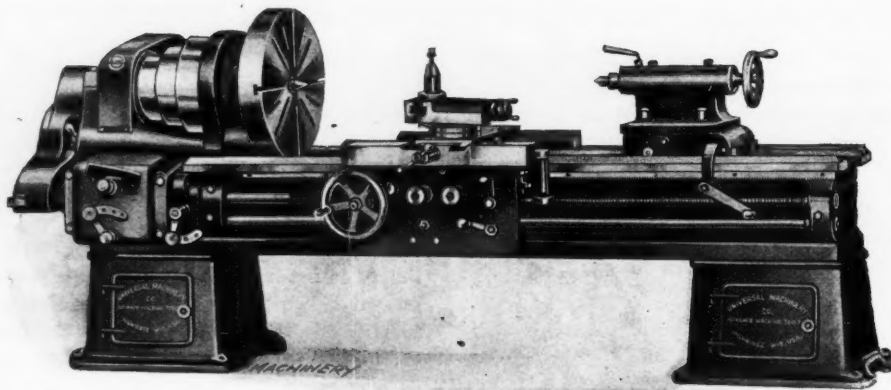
Universal Machinery Co.'s 24-inch Engine Lathe with Quick-change Gear
